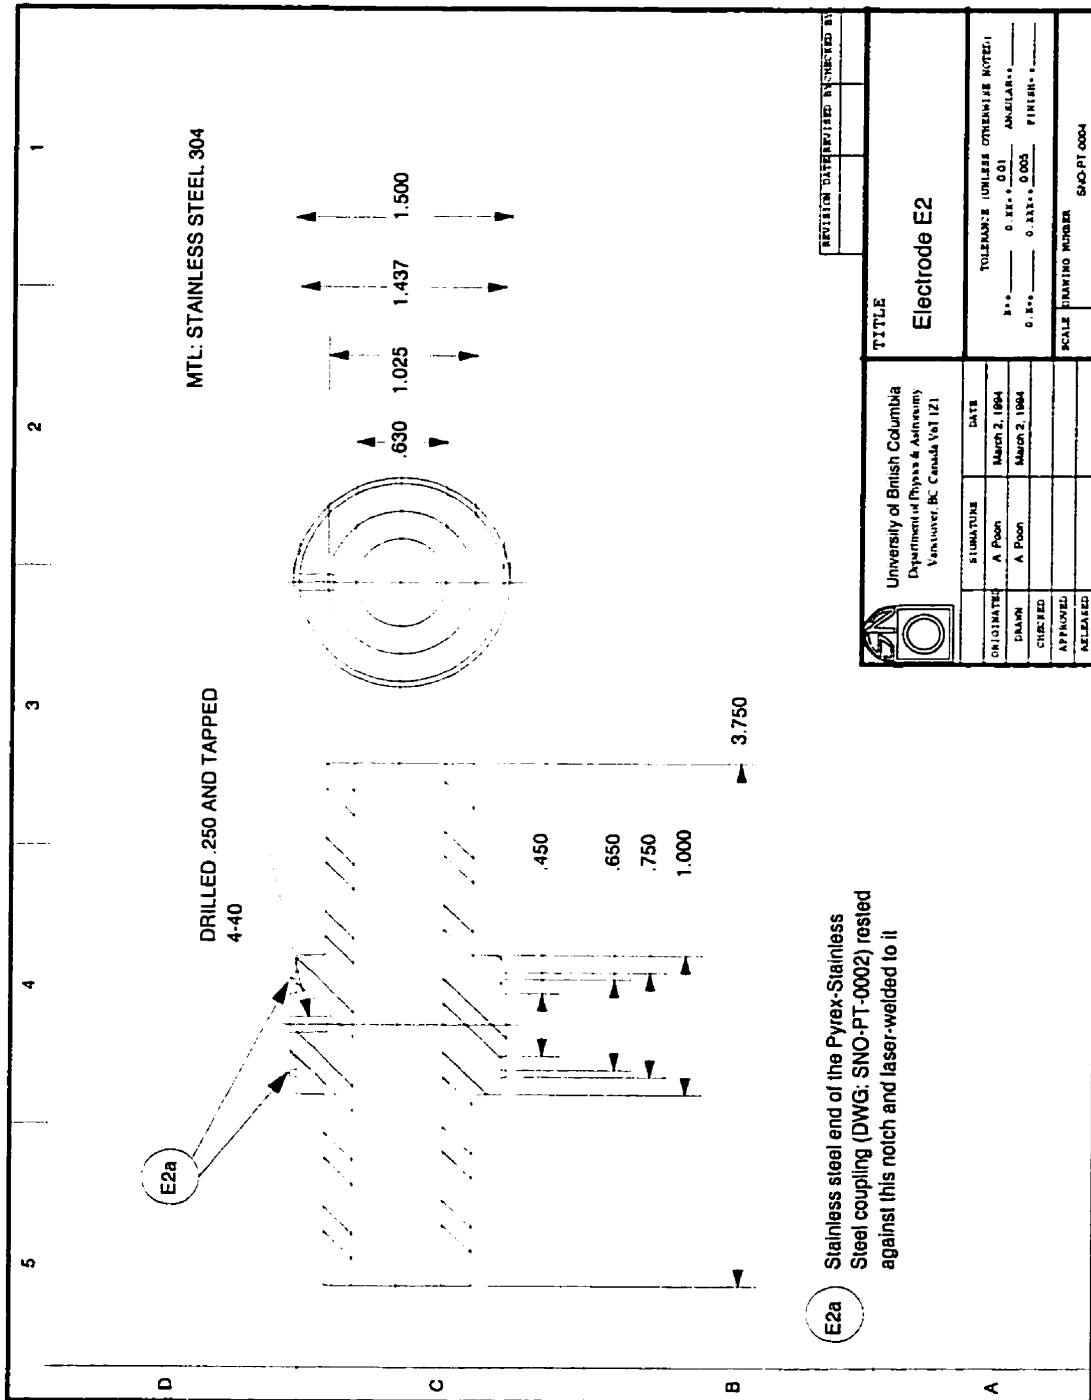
Technical drawing of the electrode E2 in the gas discharge line. (SNO-PT-0004).
